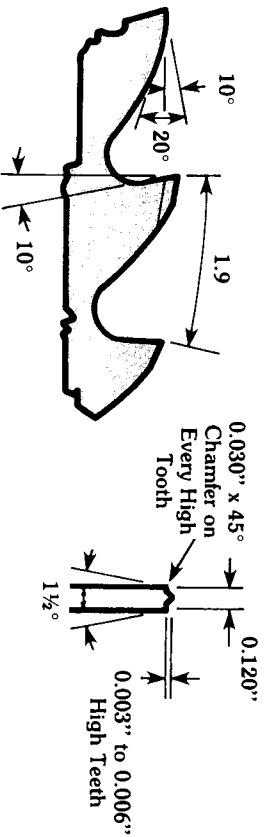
Saw for Cutting Off Magnesium Plate and Extrusions.
